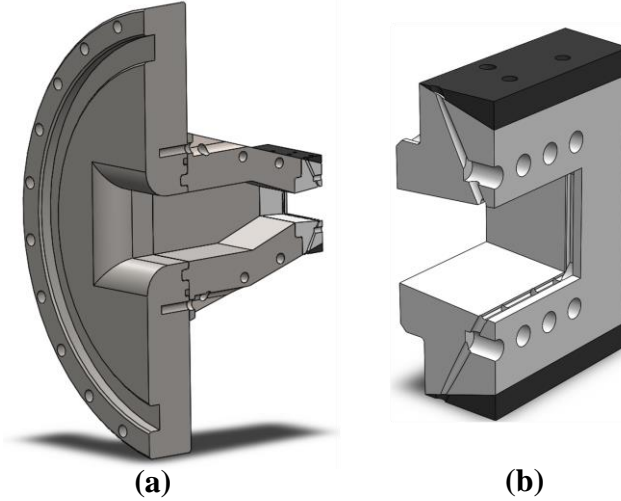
a) Nozzle assembly cutaway b) actuator block cutaway
